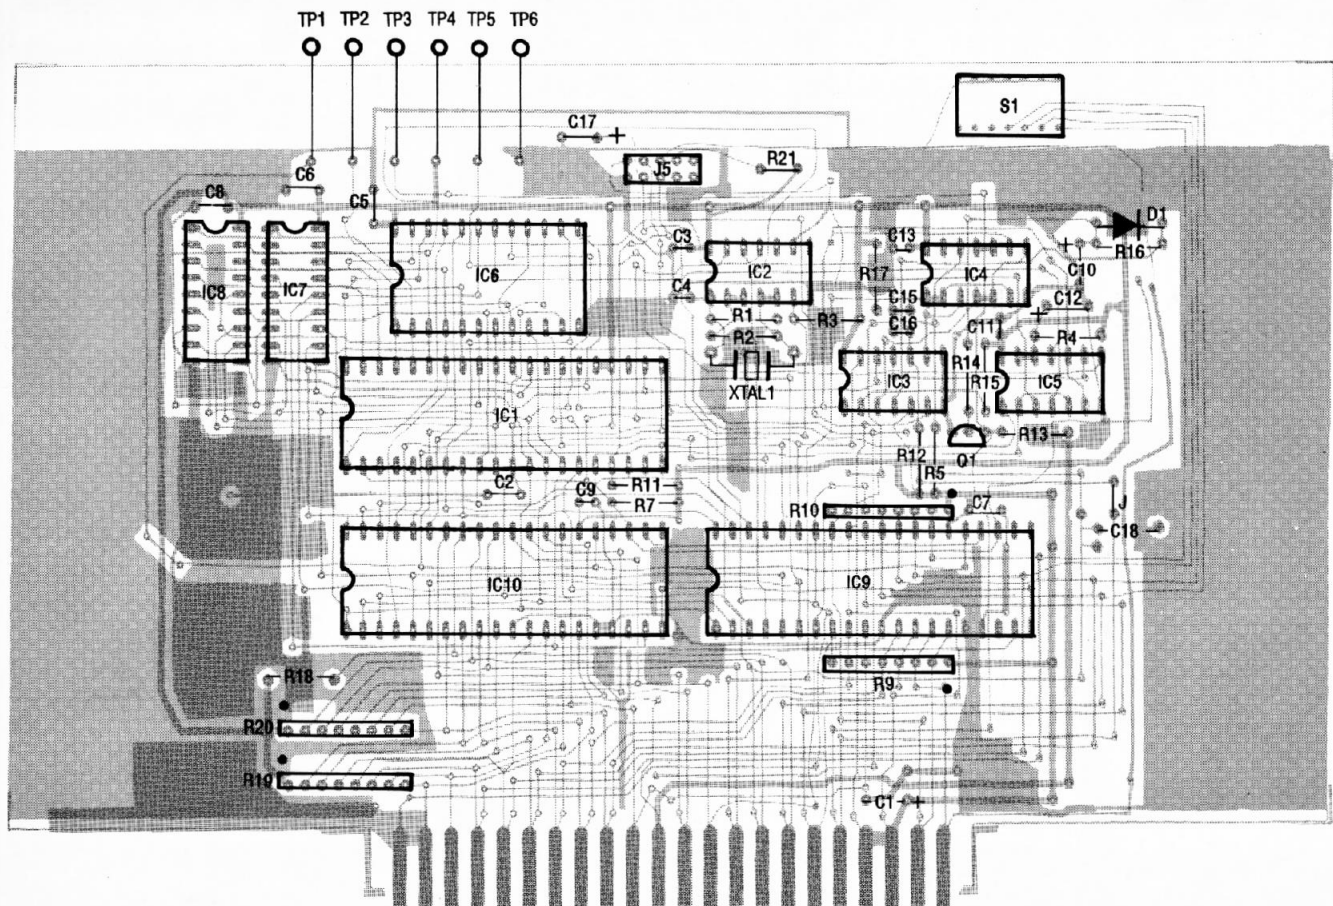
ASSEMBLE THE COMPONENTS according to this parts-placement diagram.
